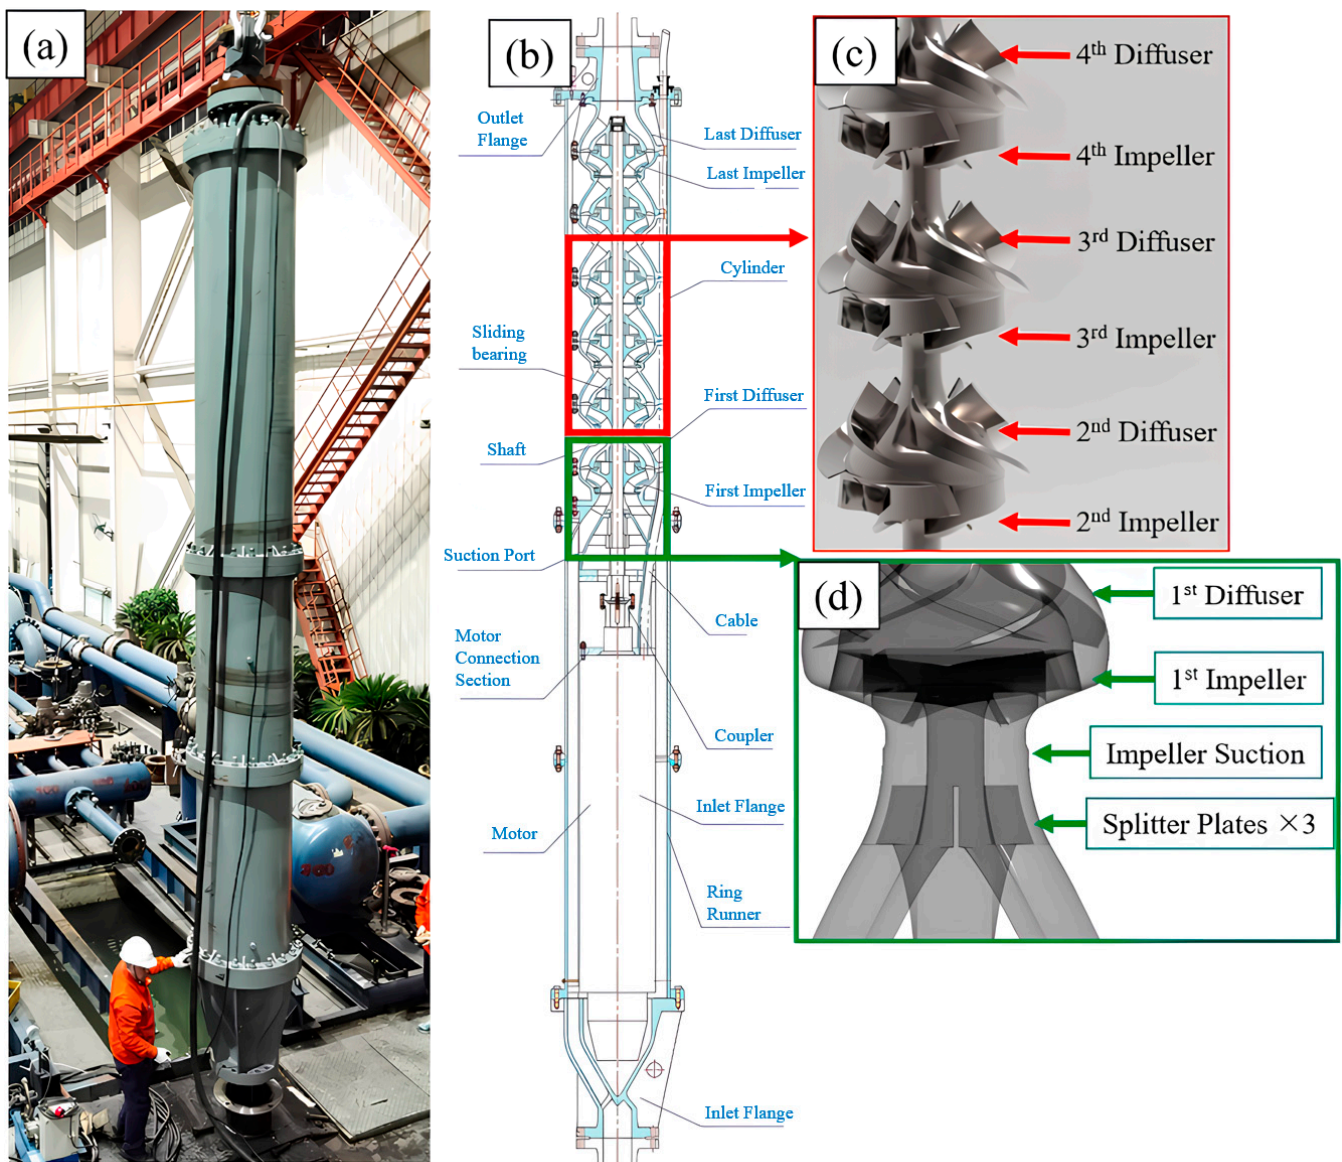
Structure of the deep-sea mining pump: (a) the pump under test; (b) overall structure; (c) Impellers and diffusers; and (d) partial enlarged drawing near the impeller suction [84].
